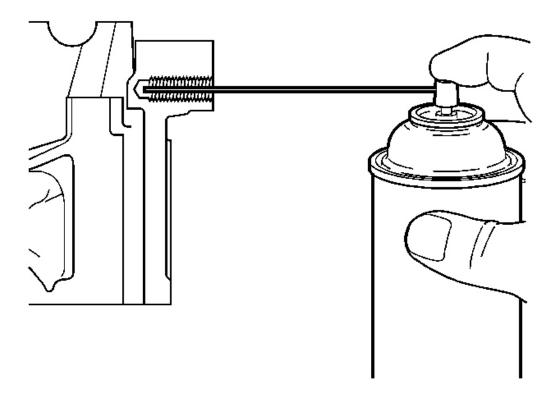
Spraying Cleaner Into Tapped Hole Courtesy of GENERAL MOTORS CORP.
